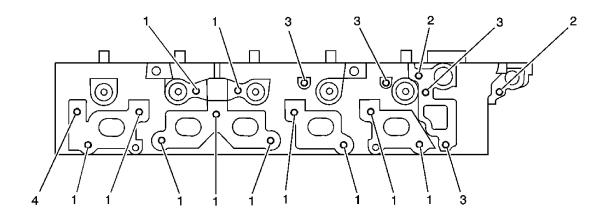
Cylinder Head - Intake Manifold Deck View Courtesy of GENERAL MOTORS CORP.
